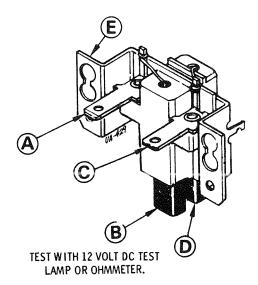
DUAL TERMINAL BRUSH TEST
